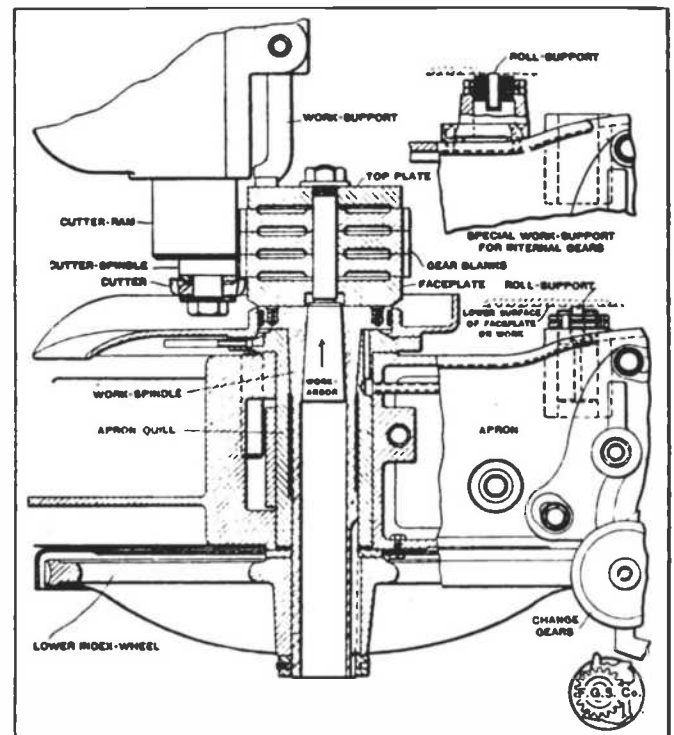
Sectional diagram showing work-support and cutting ram of gear shaper, also design of work-arbor
